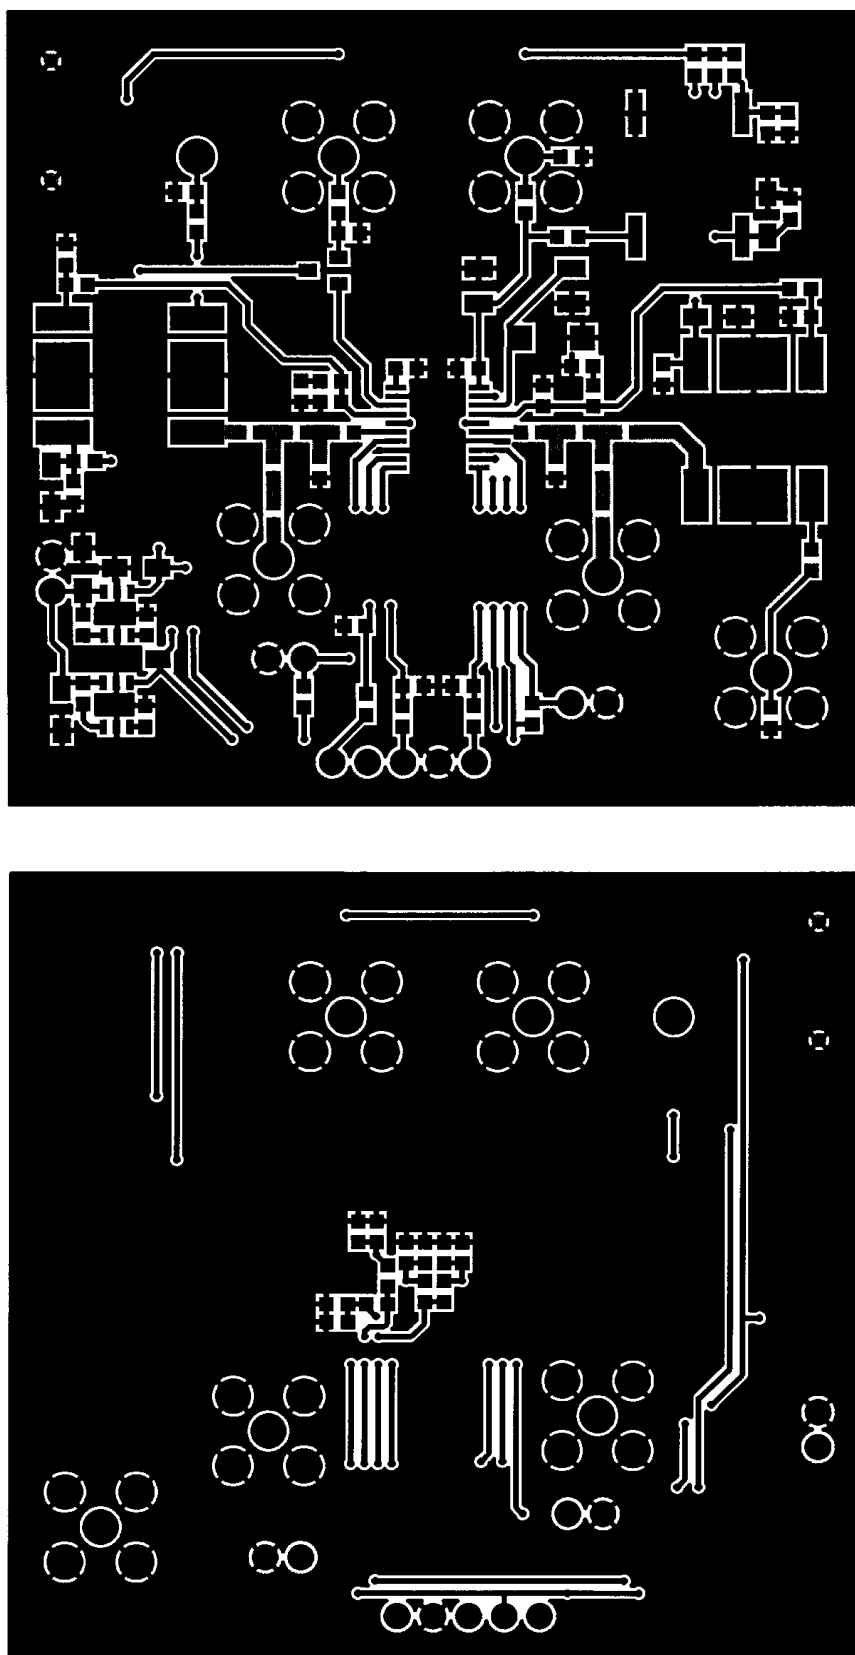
UMA1022M Demonstration Board pcb Layout.
